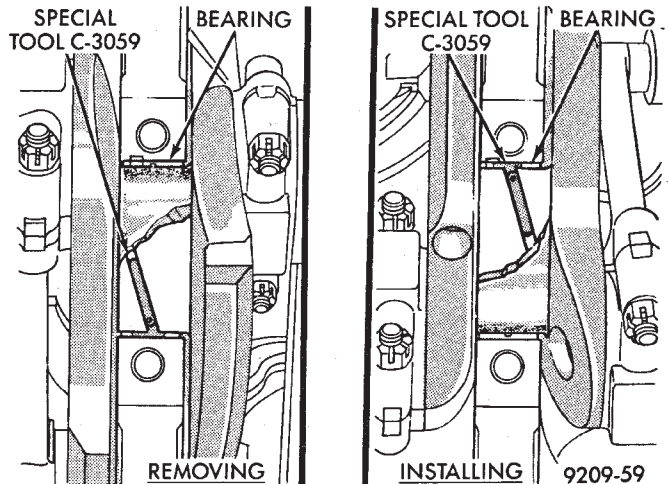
Removing and Installing Upper Main Bearing With Special Tool C-3059
